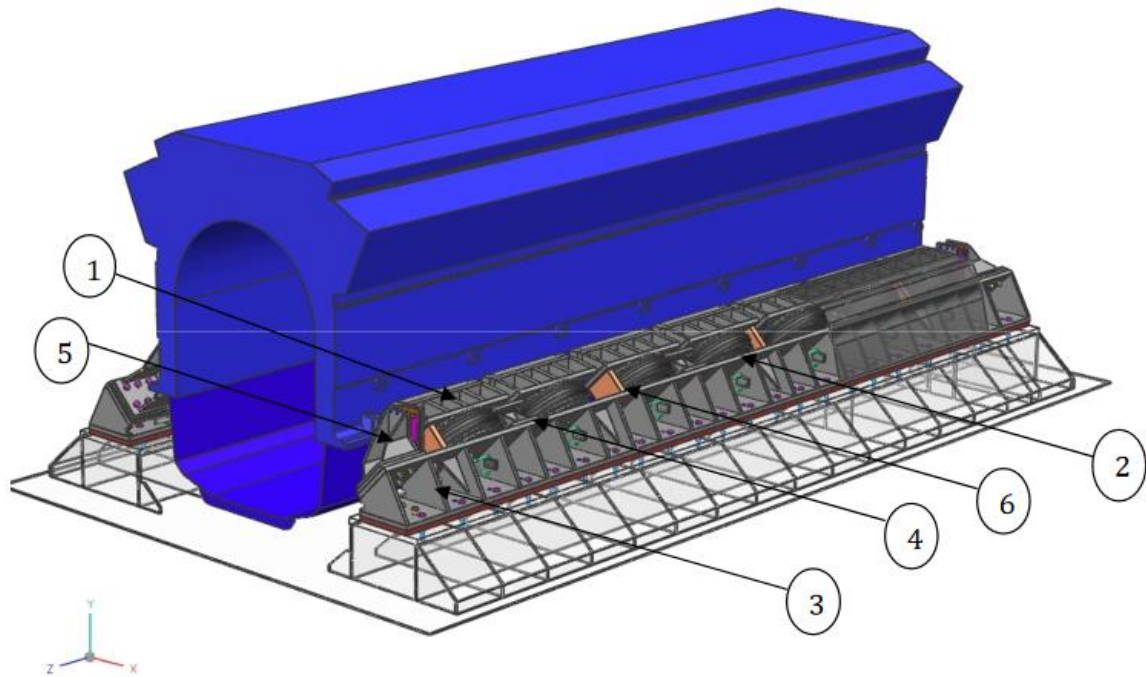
The complete assembly of the mounting system. (Långbacka, 2012, p. 11)
